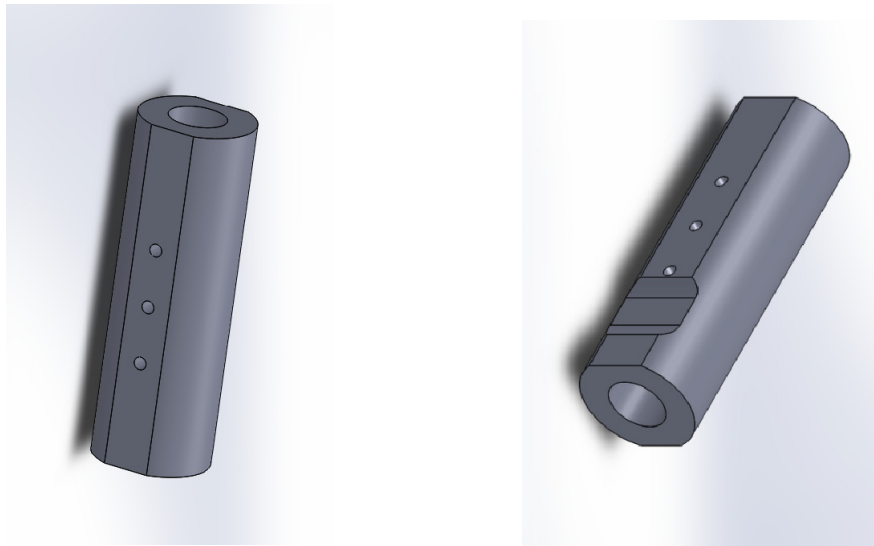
Top of simulated Delrin bone with holes for attaching bone plate (Left), Groove on the bottom end to help locate on the testing fixture (Right)
